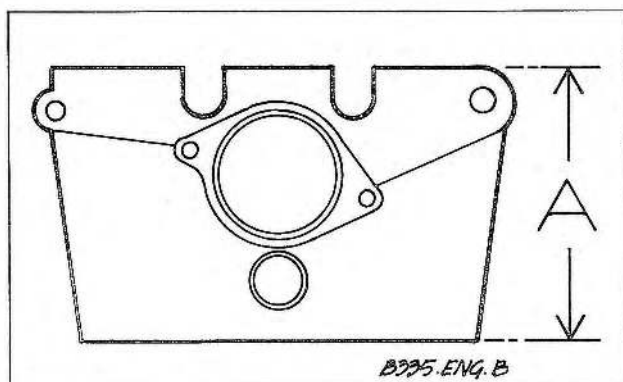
Front view of cylinder head showing minimum resurfacing dimension (A). 6-cylinder engine shown.
